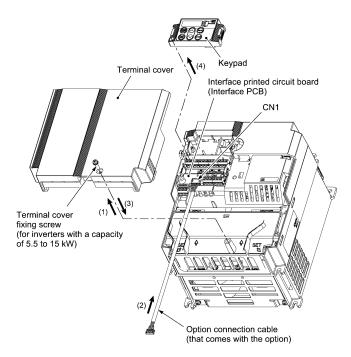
Connecting the Option Connection Cable to the Interface PCB and Removing the Keypad (For inverters with a capacity of 11 and 15 kW)
